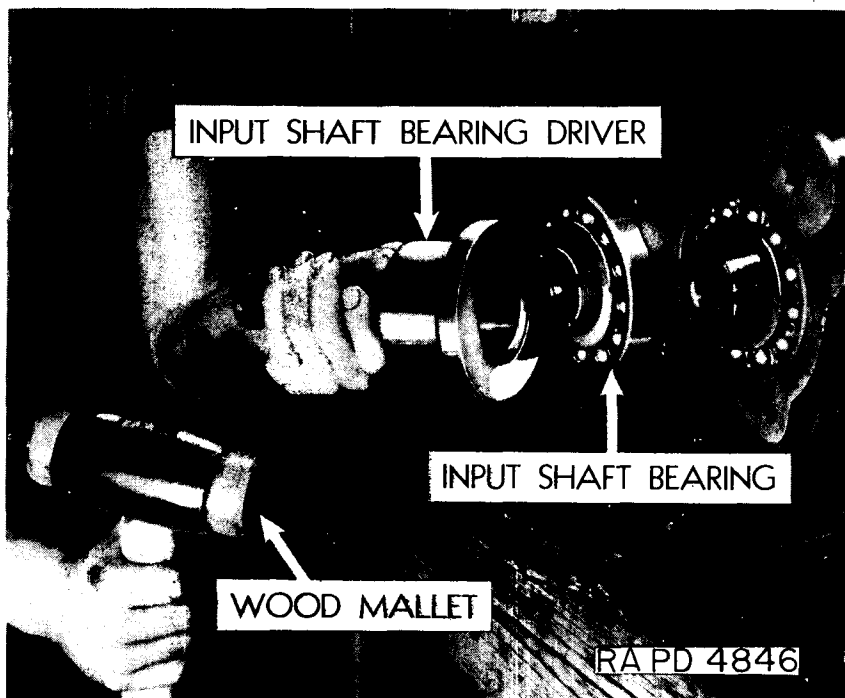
DRIVING INPUT SHAFT BEARING INTO PLACE
